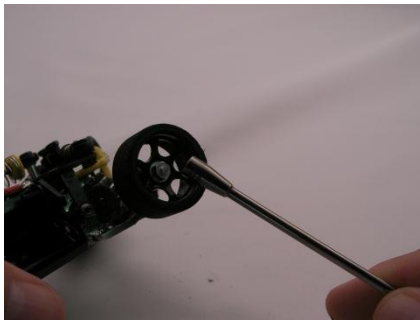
Install 3 x 6 2.5mm bushing/bearing onto diff axle & apply small amount of non-permanent threadlock on diff shaft end
